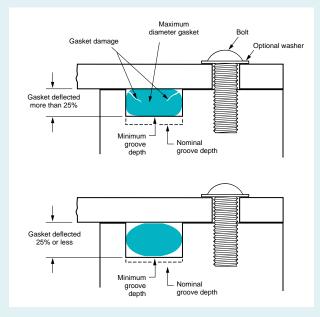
Section B-B from Figure 28c – Worst Case Maximum Deflection (*Maximum* gasket diameter, minimum groove depth)
